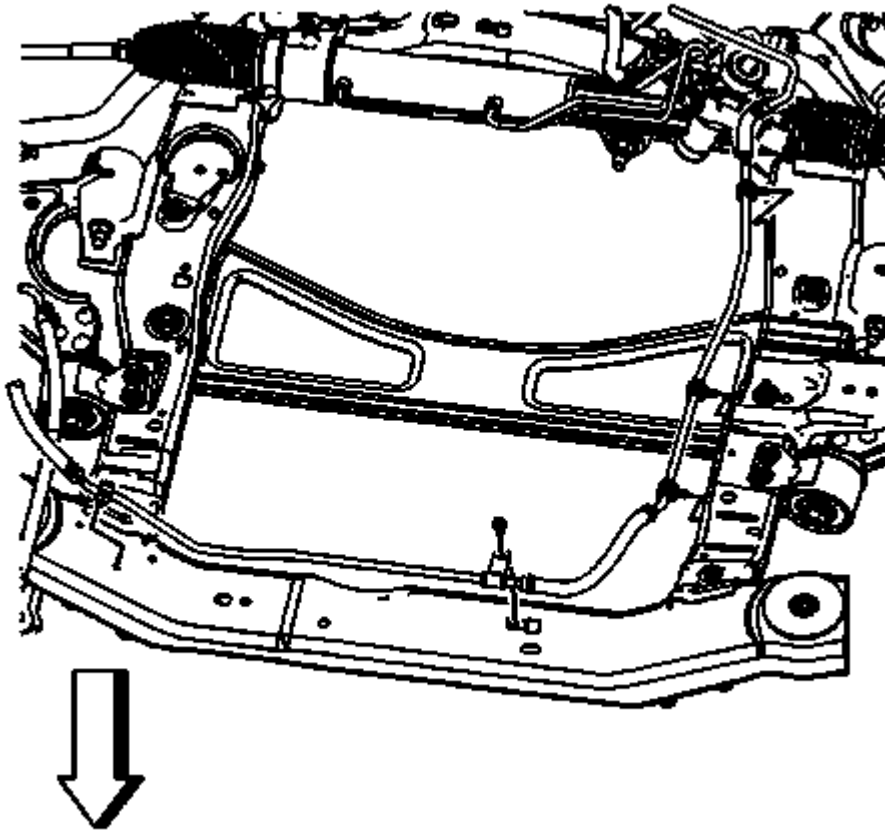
Identifying Power Steering Cooler Inlet Pipe
